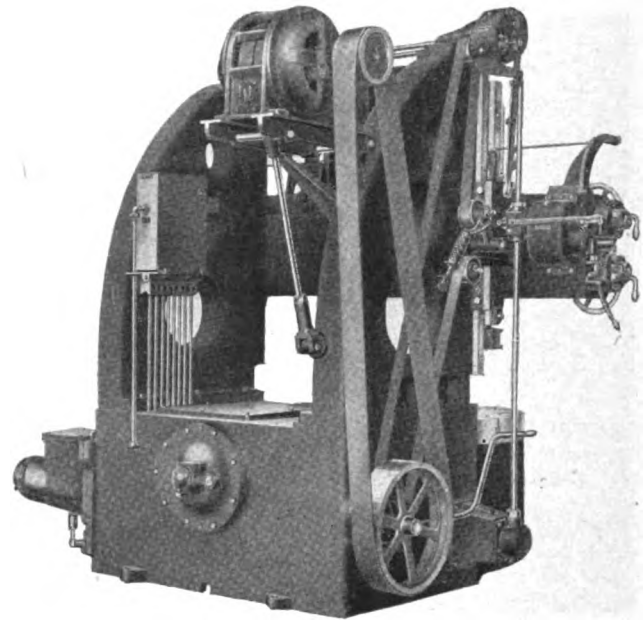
The Maxi-Mill, Rear View, Motor Driven
